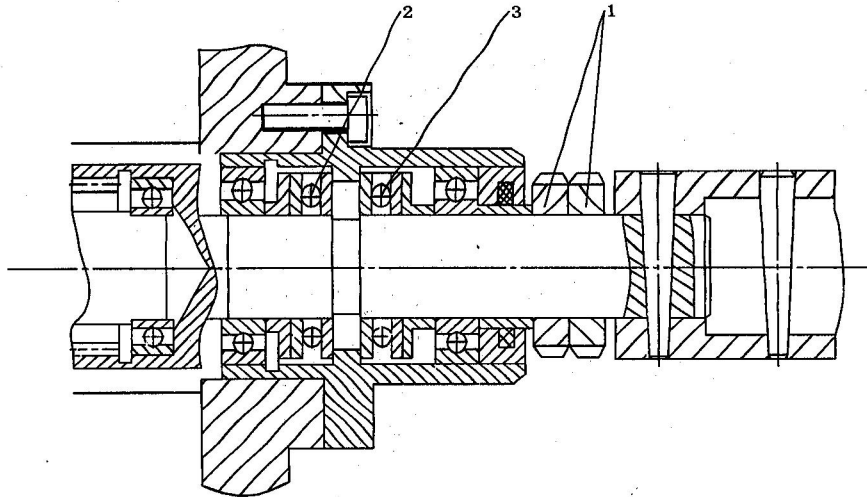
Screw shaft anti-thrust bearing adjustment diagram
